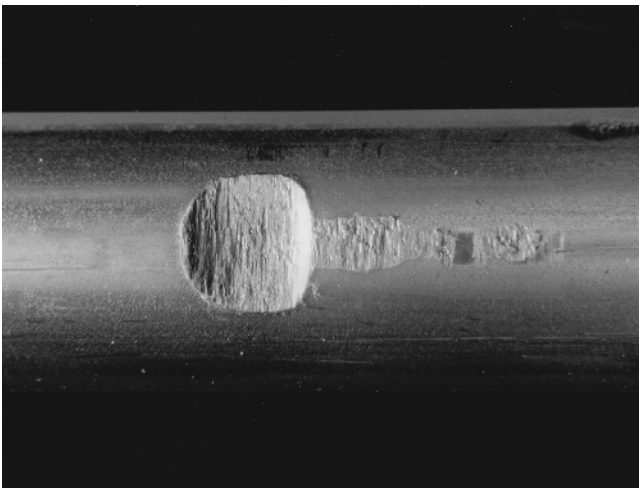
Fretting Wear of a Gas Heat Exchanger Tube at a Baffle Edge Location.
